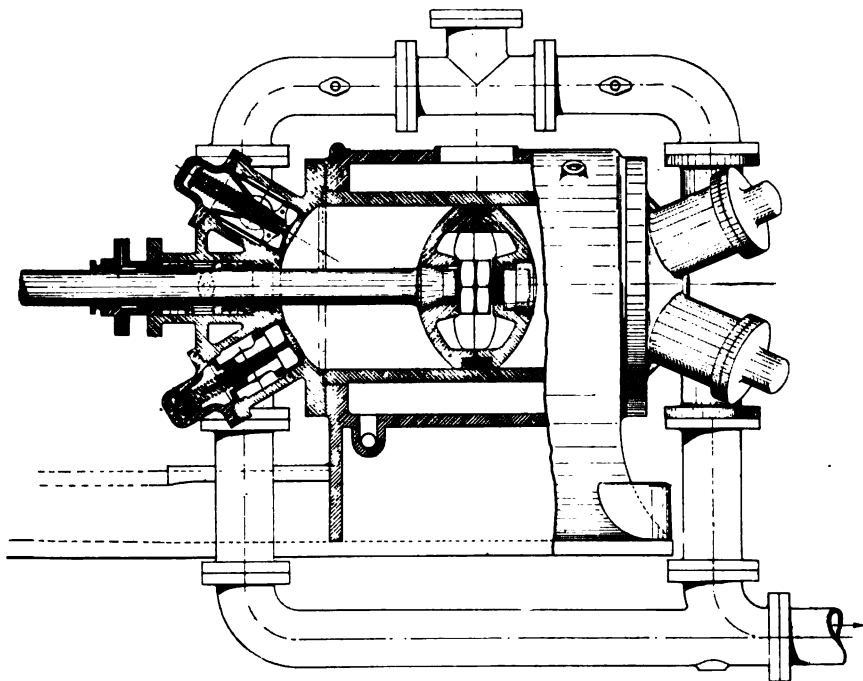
SECTION AMERICAN LINDE COMPRESSOR CYLINDER,
